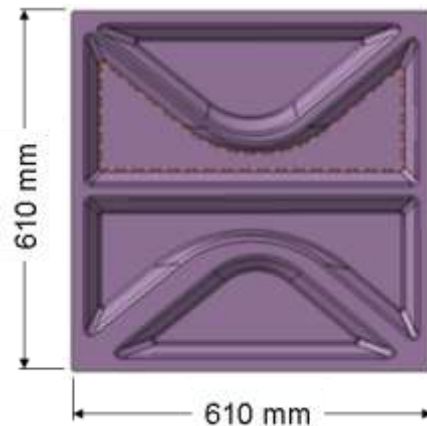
ACC BLRT Root Cause Analysis Inner Panel.
